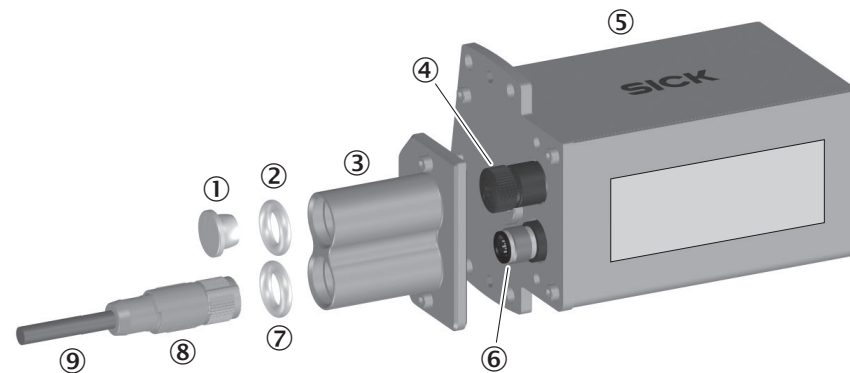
Assembly of IP69K protective housing, without use of the Ethernet connection
